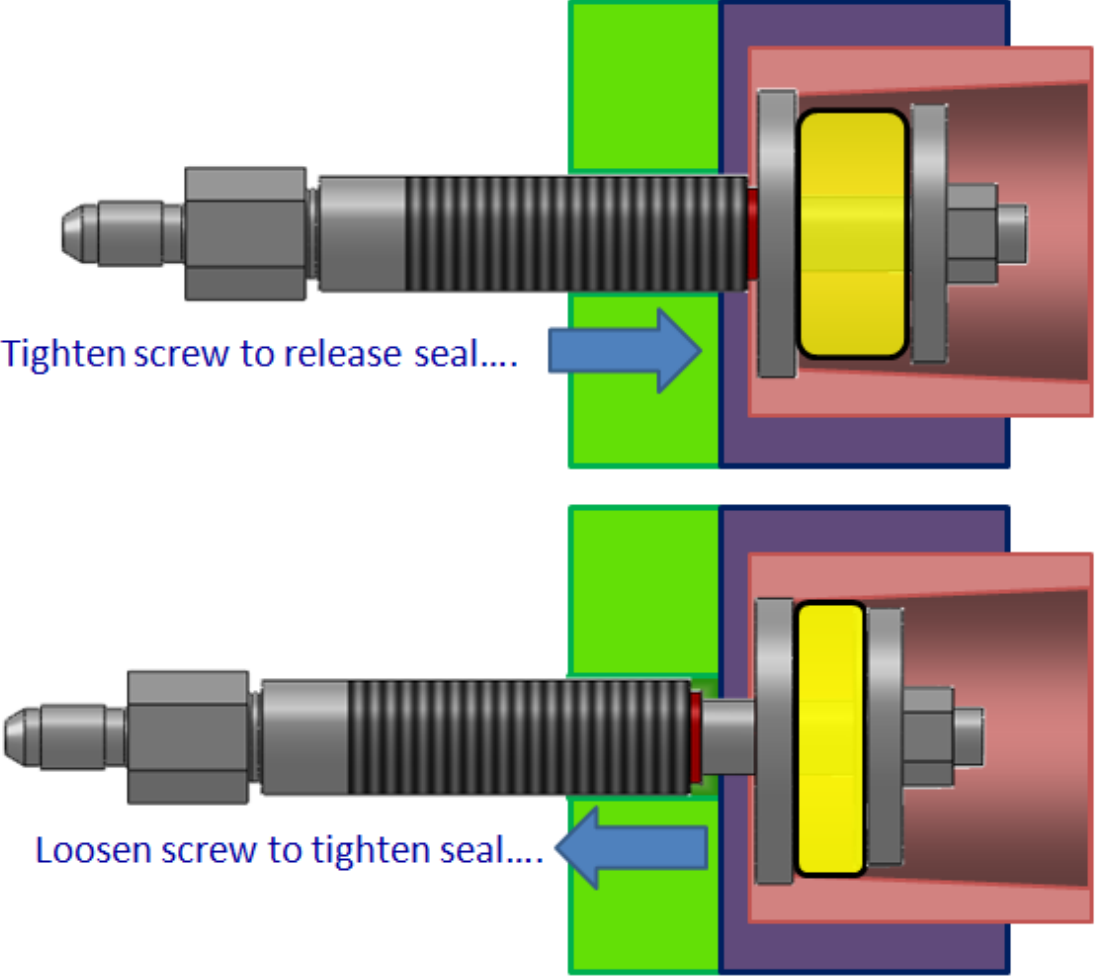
Cross-section of the sealing mechanism inside the endblock.
